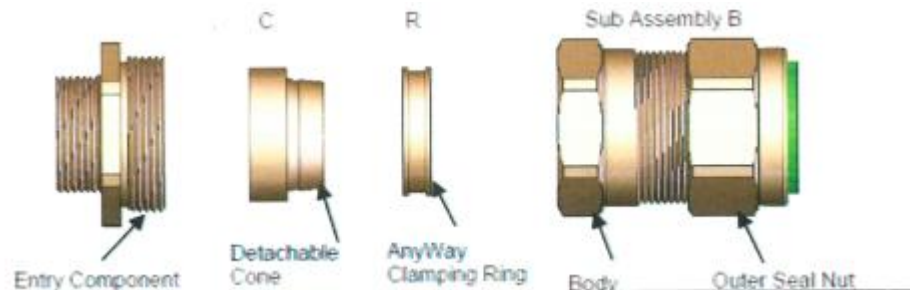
(Sample Pic) Armored Cable Gland Parts
